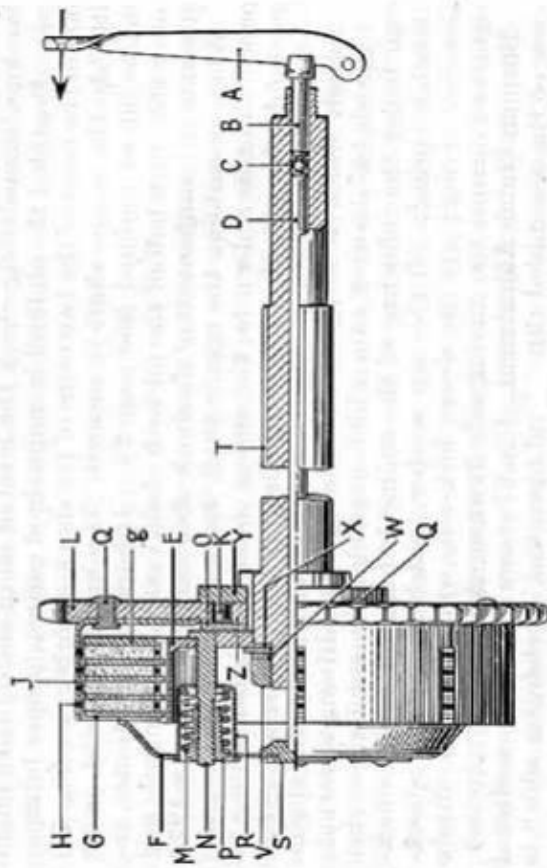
DETAILS OF BURMAN MULTI-PLATE CLUTCH AND OPERATING MECHANISM
